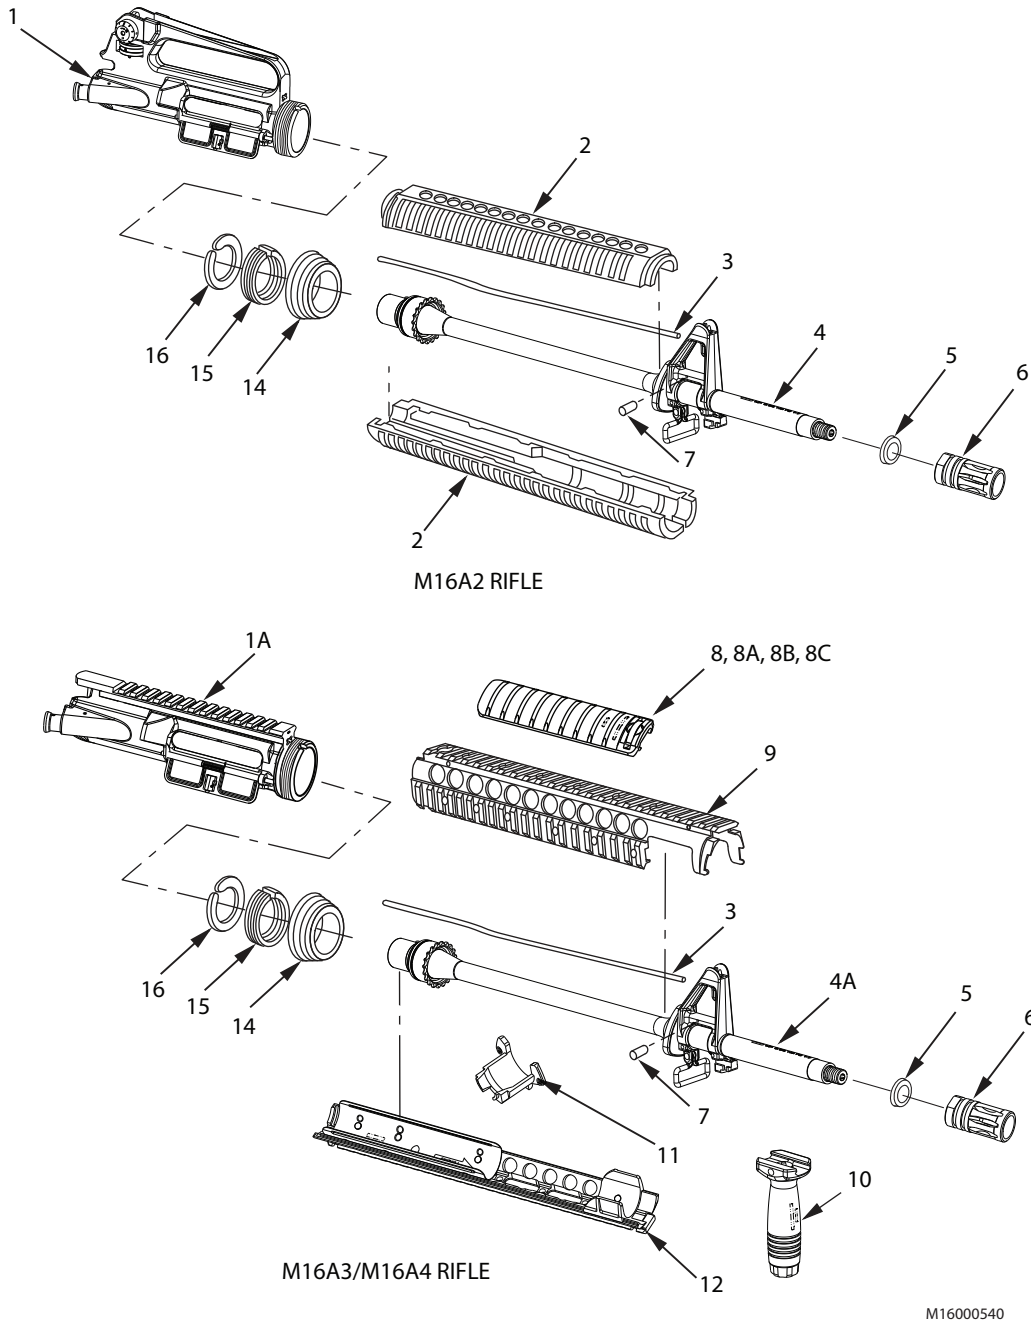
UPPER RECEIVER AND BARREL ASSEMBLY 9349050, 12973010, AND 12972680 (Sheet 1 of 2).
